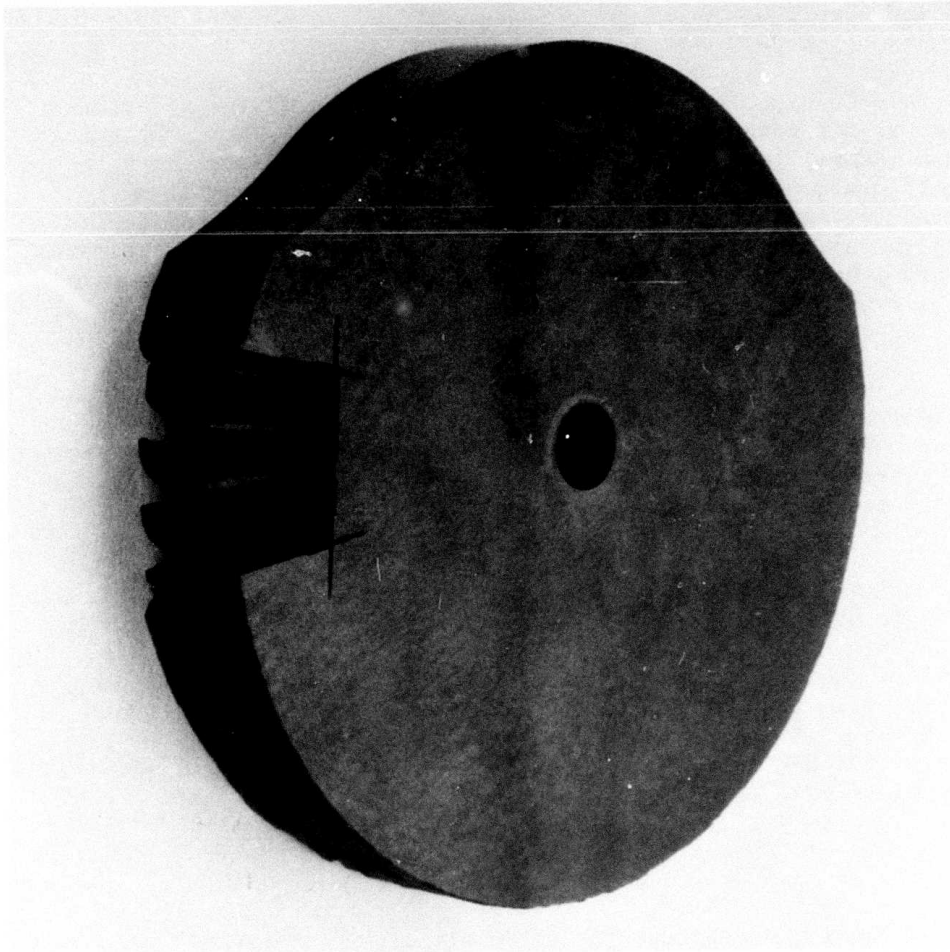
Hot-Pressed Disk with Extra Stock Removed
